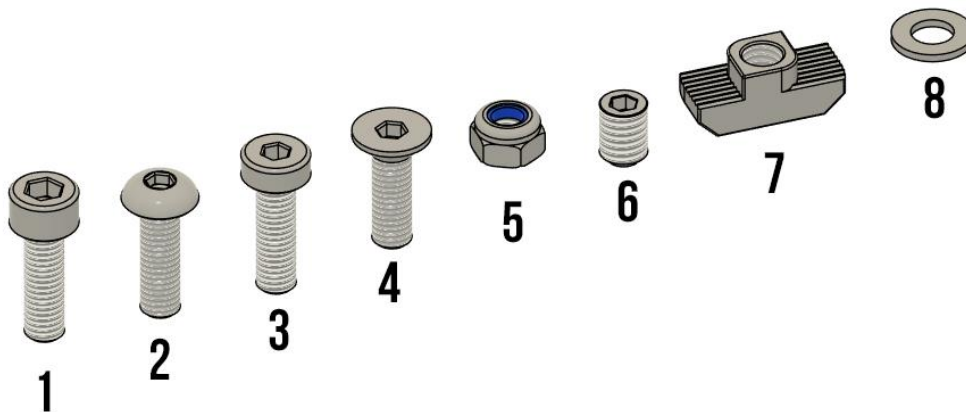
Fasteners from the Rat Rig CAD repository 1- Cap Head screw, 2- Button head screw, 3 - Low head screw, 4 - Countersink screw, 5 - Nylon locking nut, 6 - Set screw, 7 - Drop-in T-nut, 8 - Washer
